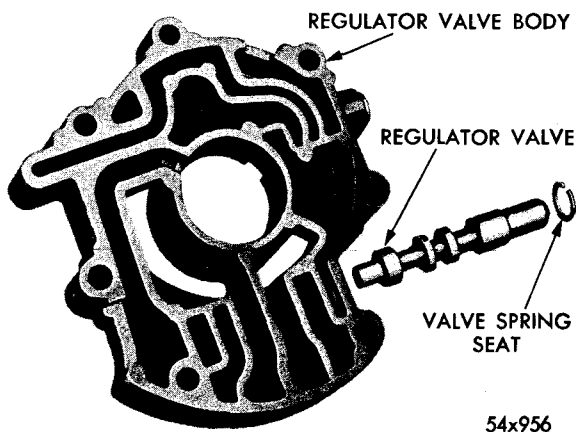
Torque Converter Regulator Valve Body (Disassembled View)
